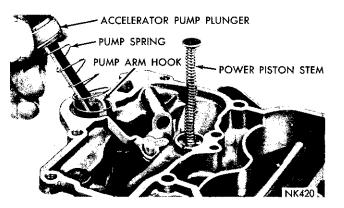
Removing or Installing the Accelerator Pump Plunger
